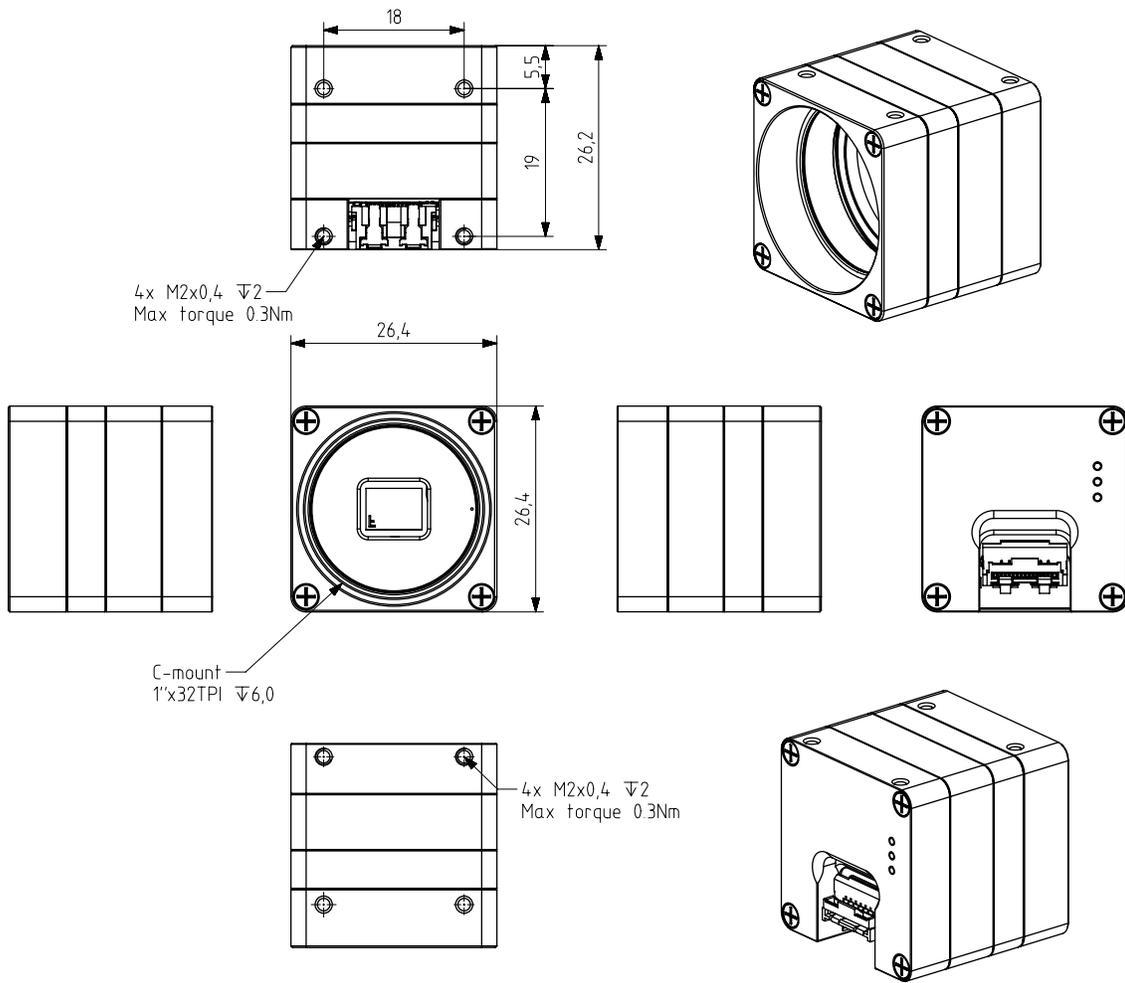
Dimensional drawing of MQ013xG-E2-FV
